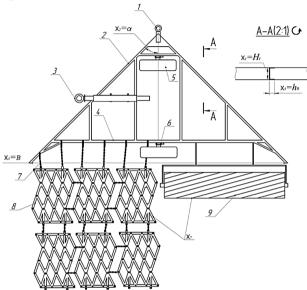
The scheme of the machine (leveler-softener) that works the soil in a combined way before planting. 1-tractor suspension device (in operation); 2-side sections; 3- tractor suspension device (in the state of transportation); 4-the last section; 5-wheel; 6-wheel column guide; 7-chain; 8-harrow; 9-roller.
